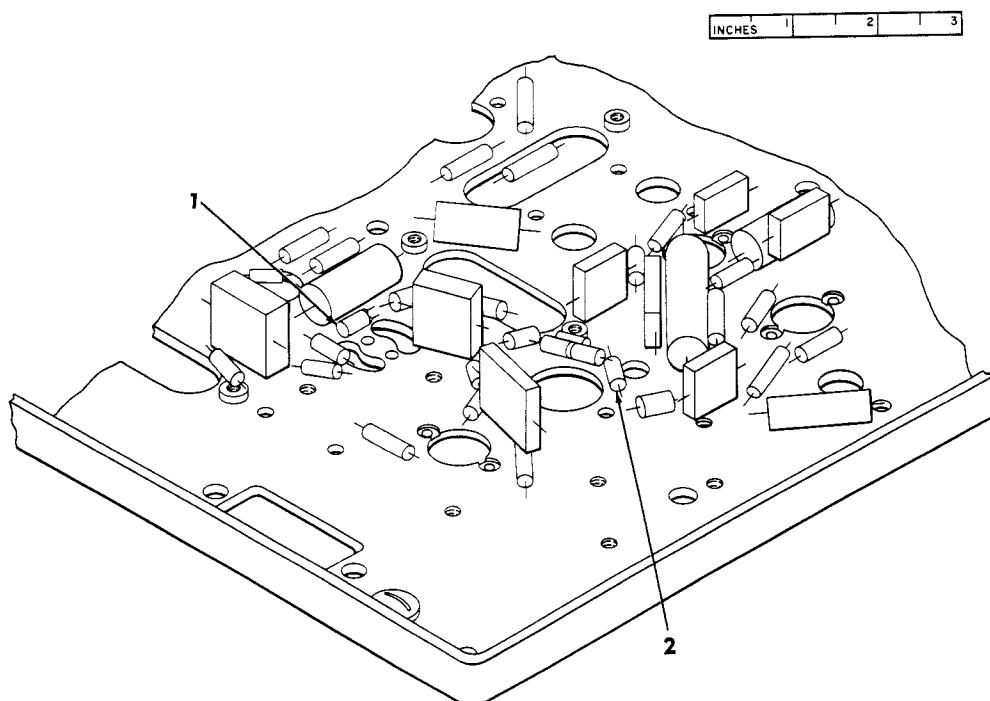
Coder, radar, guided missile (8159349)—partial exploded view
